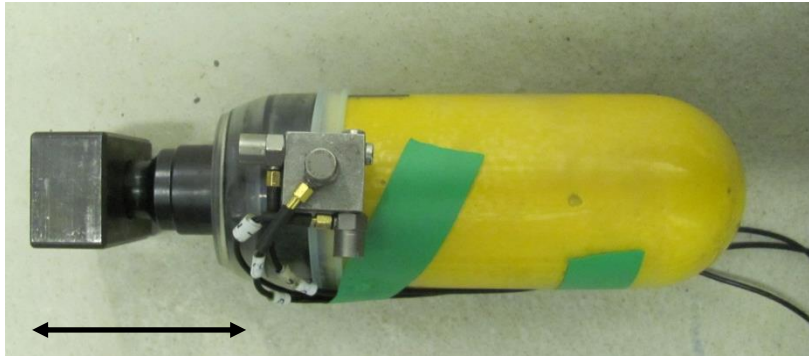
The bucking bar used to close the rivets, showing the position of the mounting block and accelerometers for measurement of the in-use vibration
